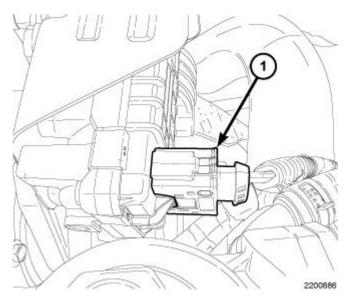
Engine Oil Filter Housing Courtesy of CHRYSLER LLC
